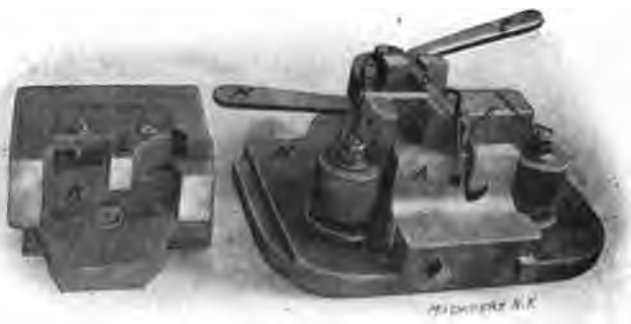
Bending Attachment with Removable Die. Operation Completed
